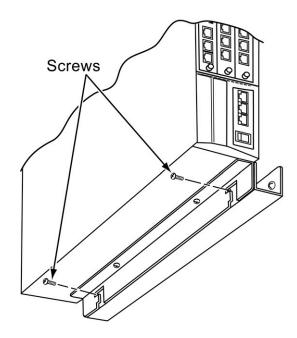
Secure Metal Fitting to Lower Wall Mount Bracket with Screws
